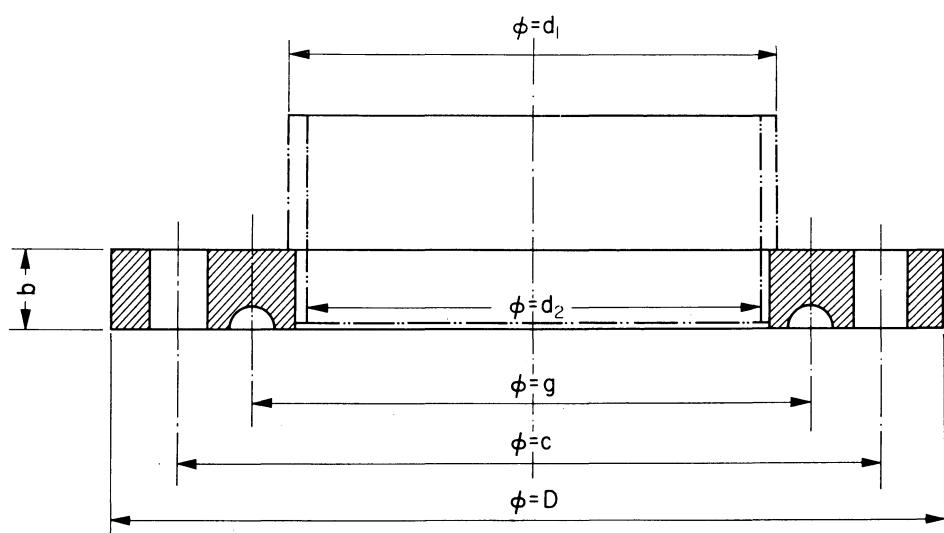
Dimensions of flanges for O-ring seals (Table 3.34). After Henry⁵³⁹
